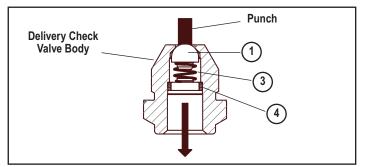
Check Valve Disassembly - Type "B" End Cover
